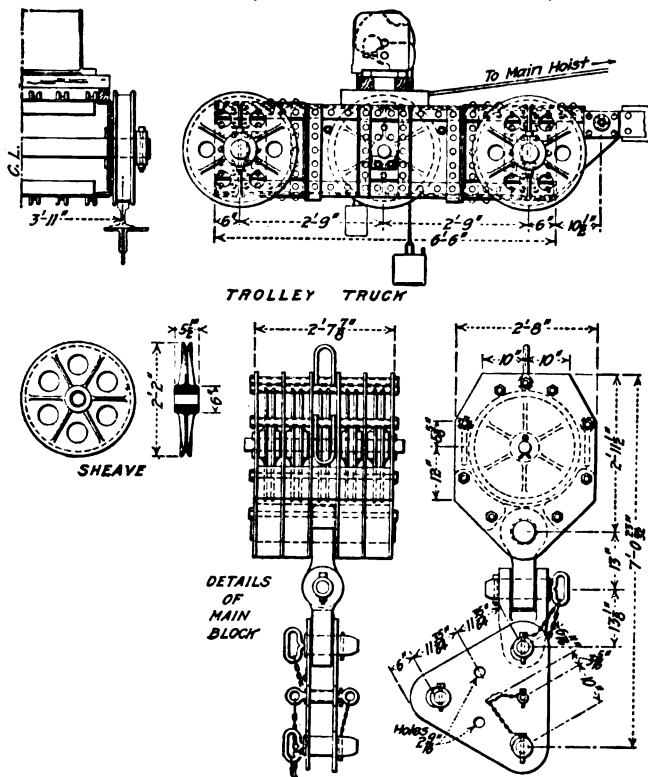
MAIN-HOIST SHEAVE DETAILS
